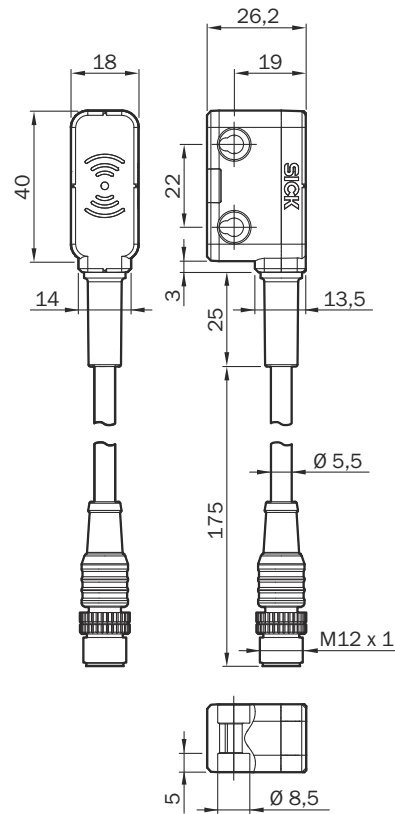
Dimensional drawing for STR1 sensor with M12 male connector
